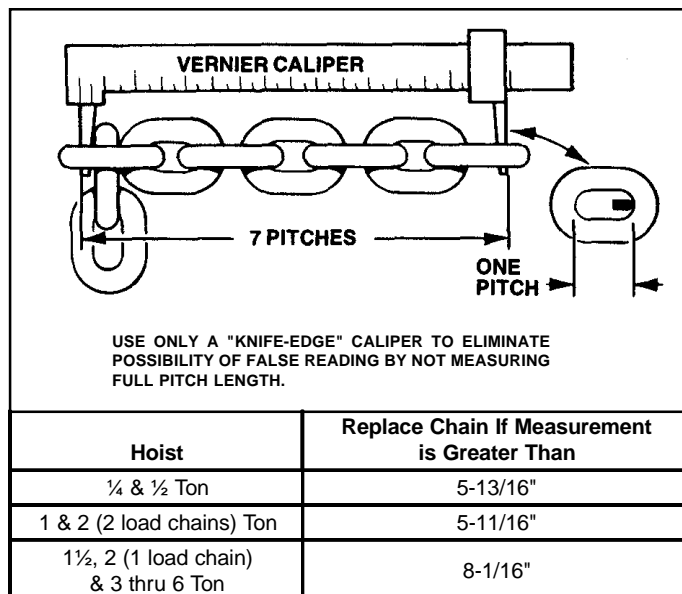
Checking Coil Chain Using Vernier Caliper
